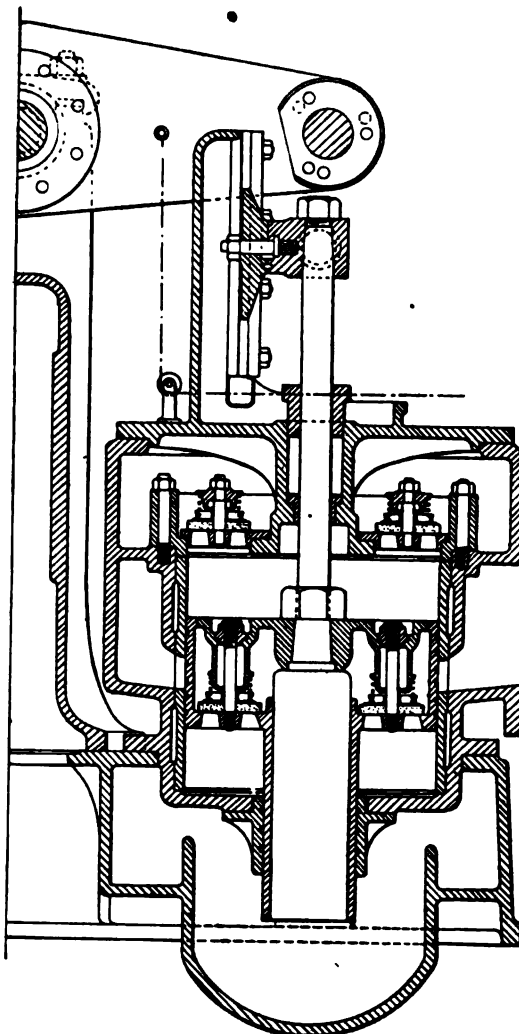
Air Pump. Davey, Paxman, & Co., Ltd., Colchester. (Sectional Elevation.)
